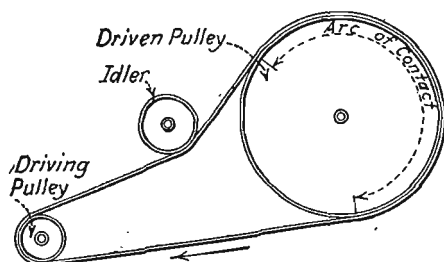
Method of placing idler on a belt; the tight side of the belt should be on the bottom.
